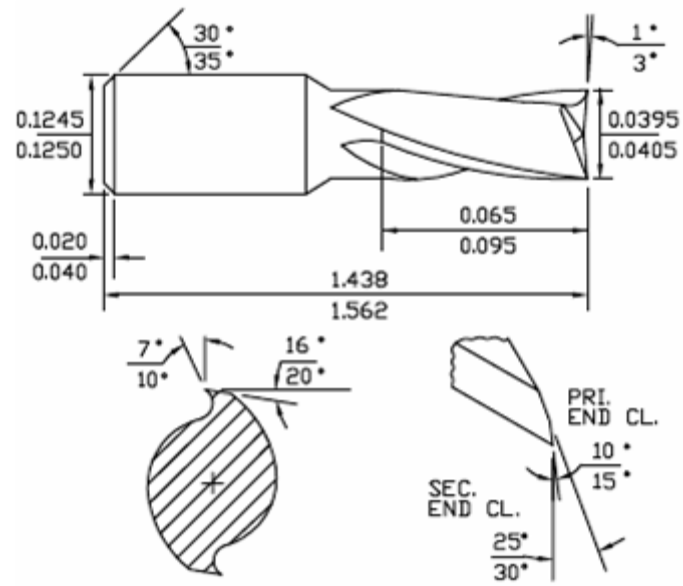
Dimensions of the microend-mill (Tool # 1640400 – 0.04x.080x1-1/2)
